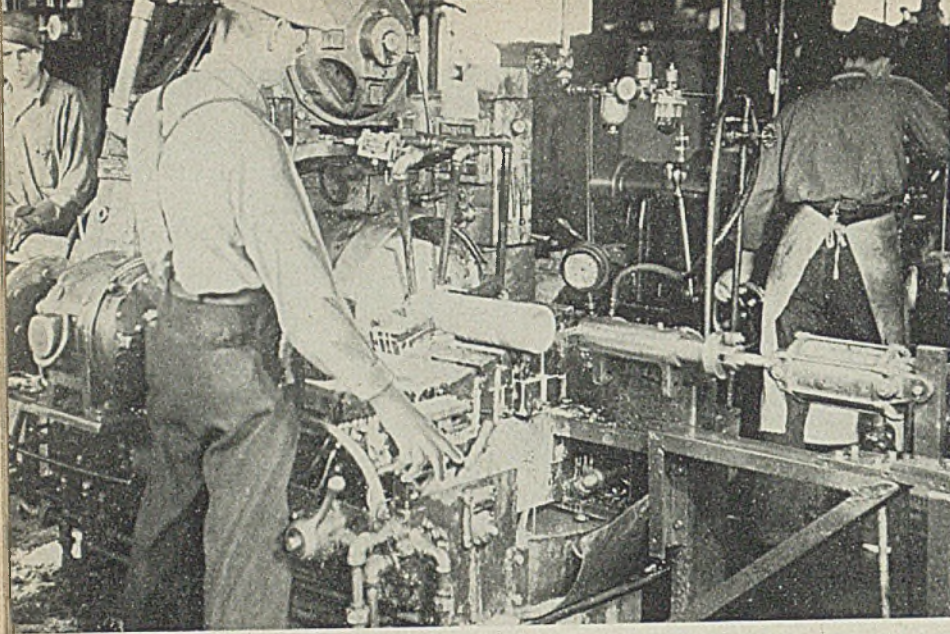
Hydraulic cut-off machine. Operator extreme left feeds tubing through machine against retractable stop operated by pneumatic cylinder shown at extreme right. This is operation 5, Table I
